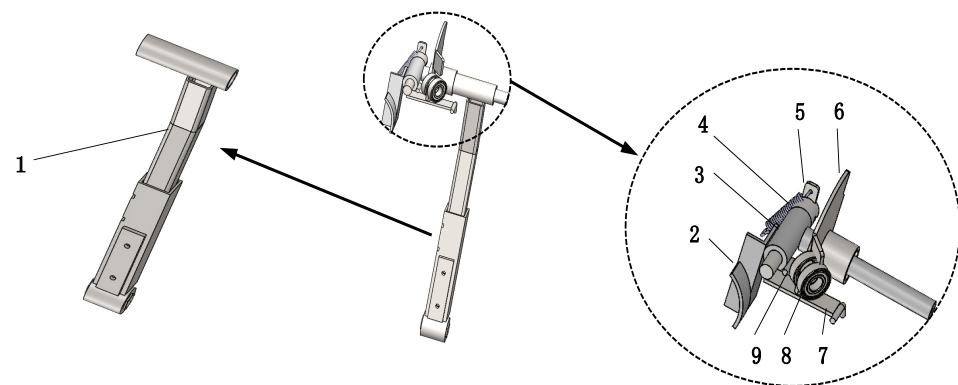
Planting arm model diagram. (1) Bending bracket; (2) bending bearing plate; (3) pressing rod arm shaft; (4) reset spring; (5) pull ring; (6) bending plate; (7) pressing rod arm; (8) runner; and (9) limit lever.
